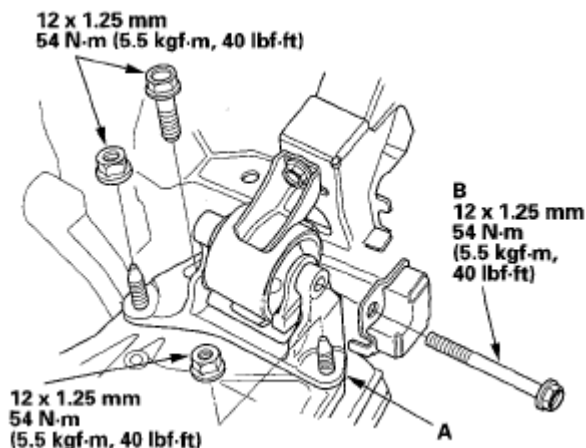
Identifying Transmission Mount Bracket And Transmission Mounting Bolt With Torque Specifications
